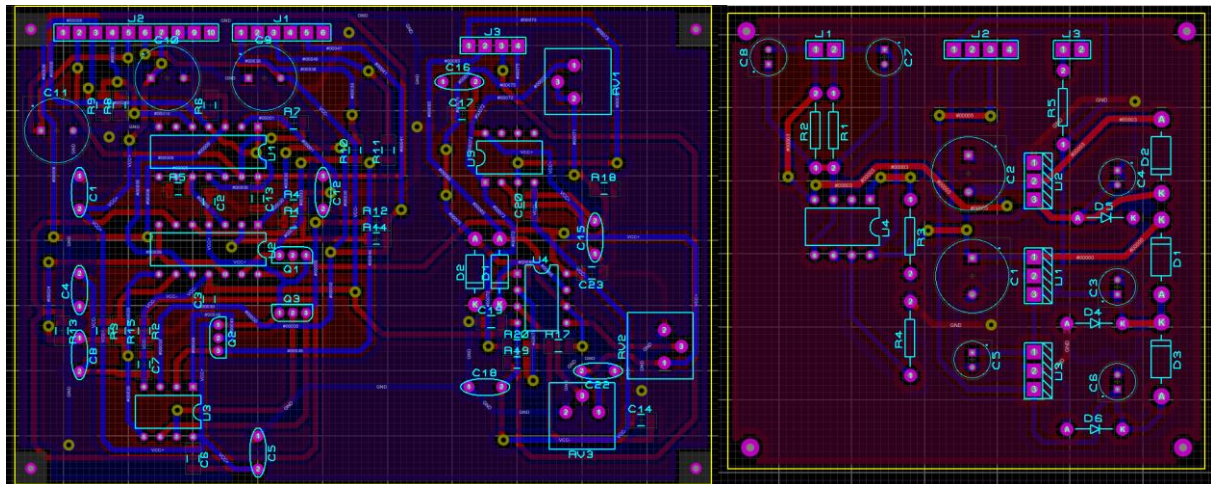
PCB design. To the left; Main board. To the right; Power supply
